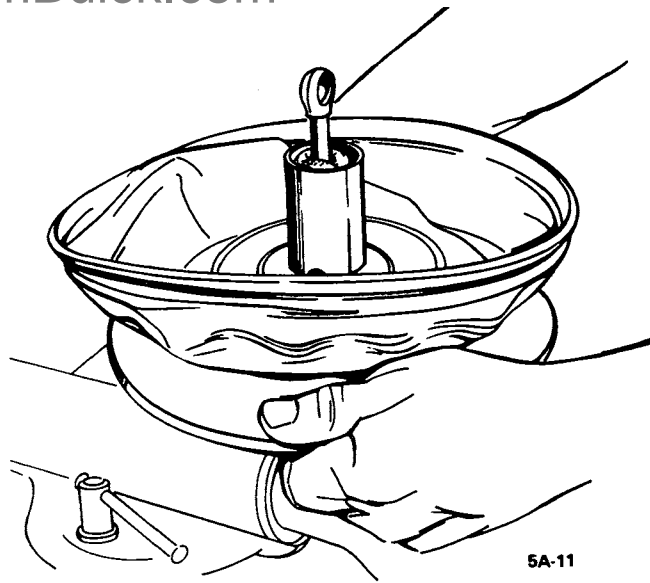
A-12 Locking or Unlocking Primary Support Plate From Primary Power Piston
